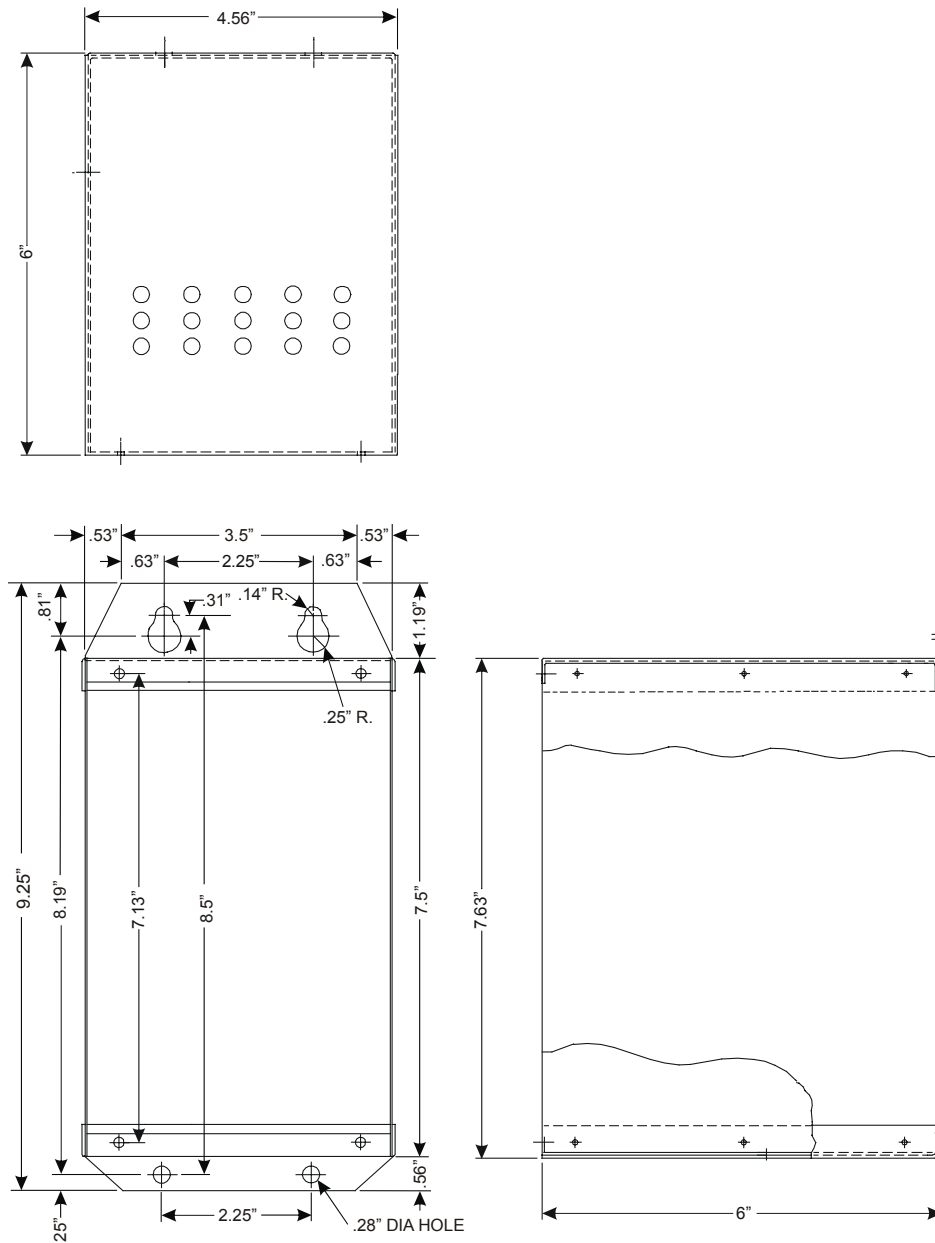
Overall Dimensions and Mounting Holes for the Shelf Mounted SSCT
